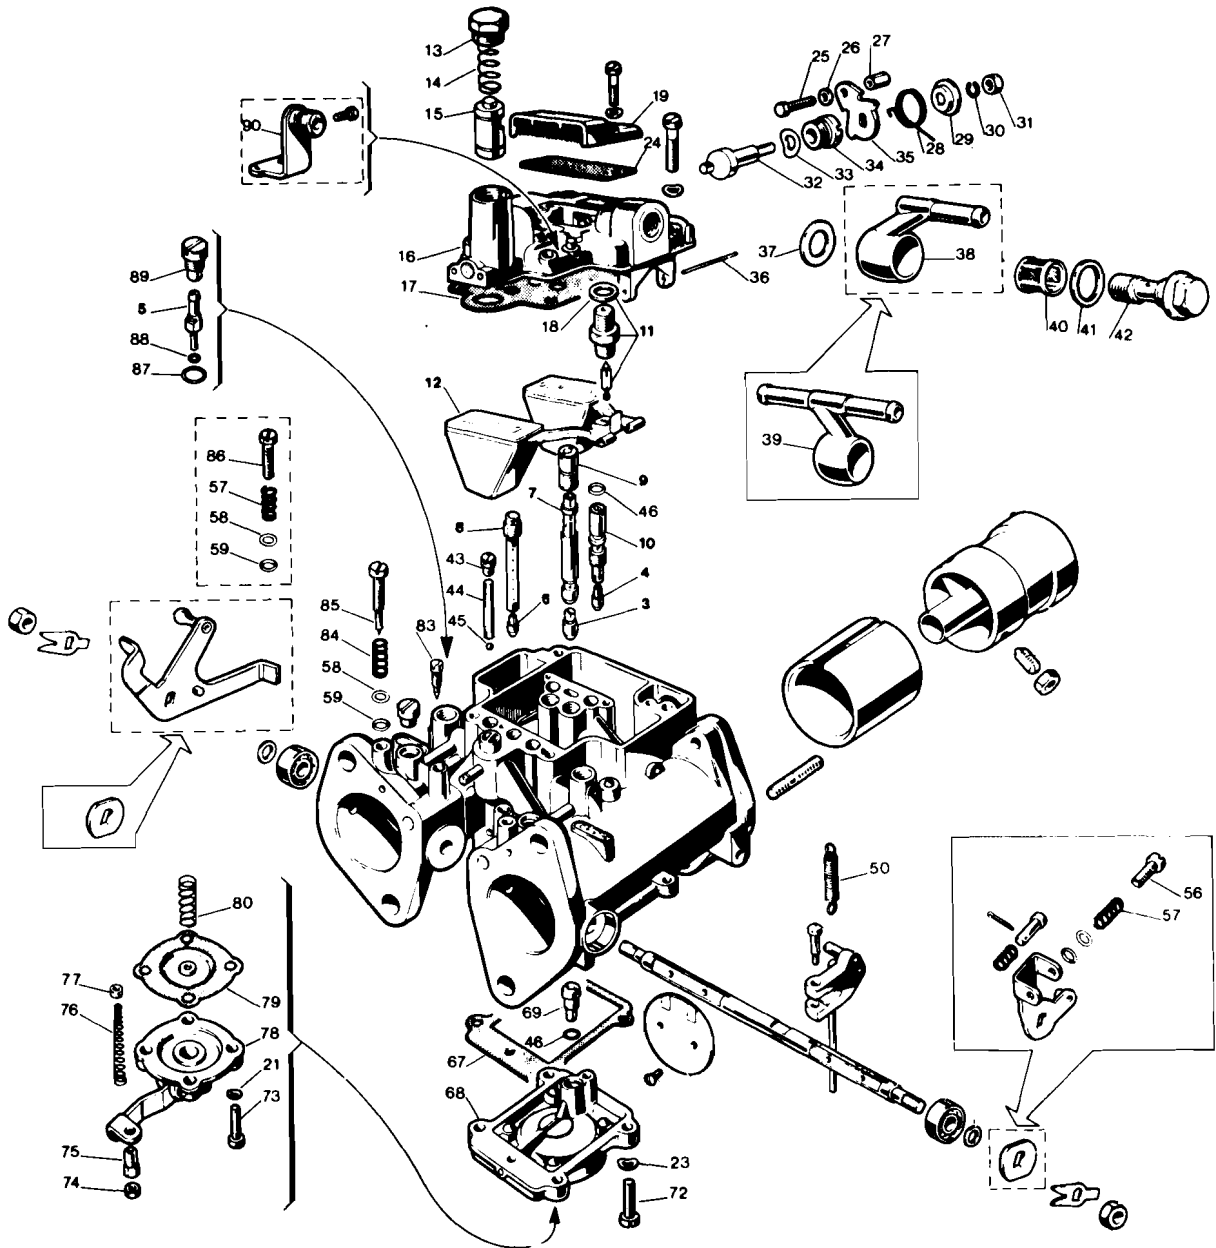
Exploded view of Solex carburettor (Sec 12)
